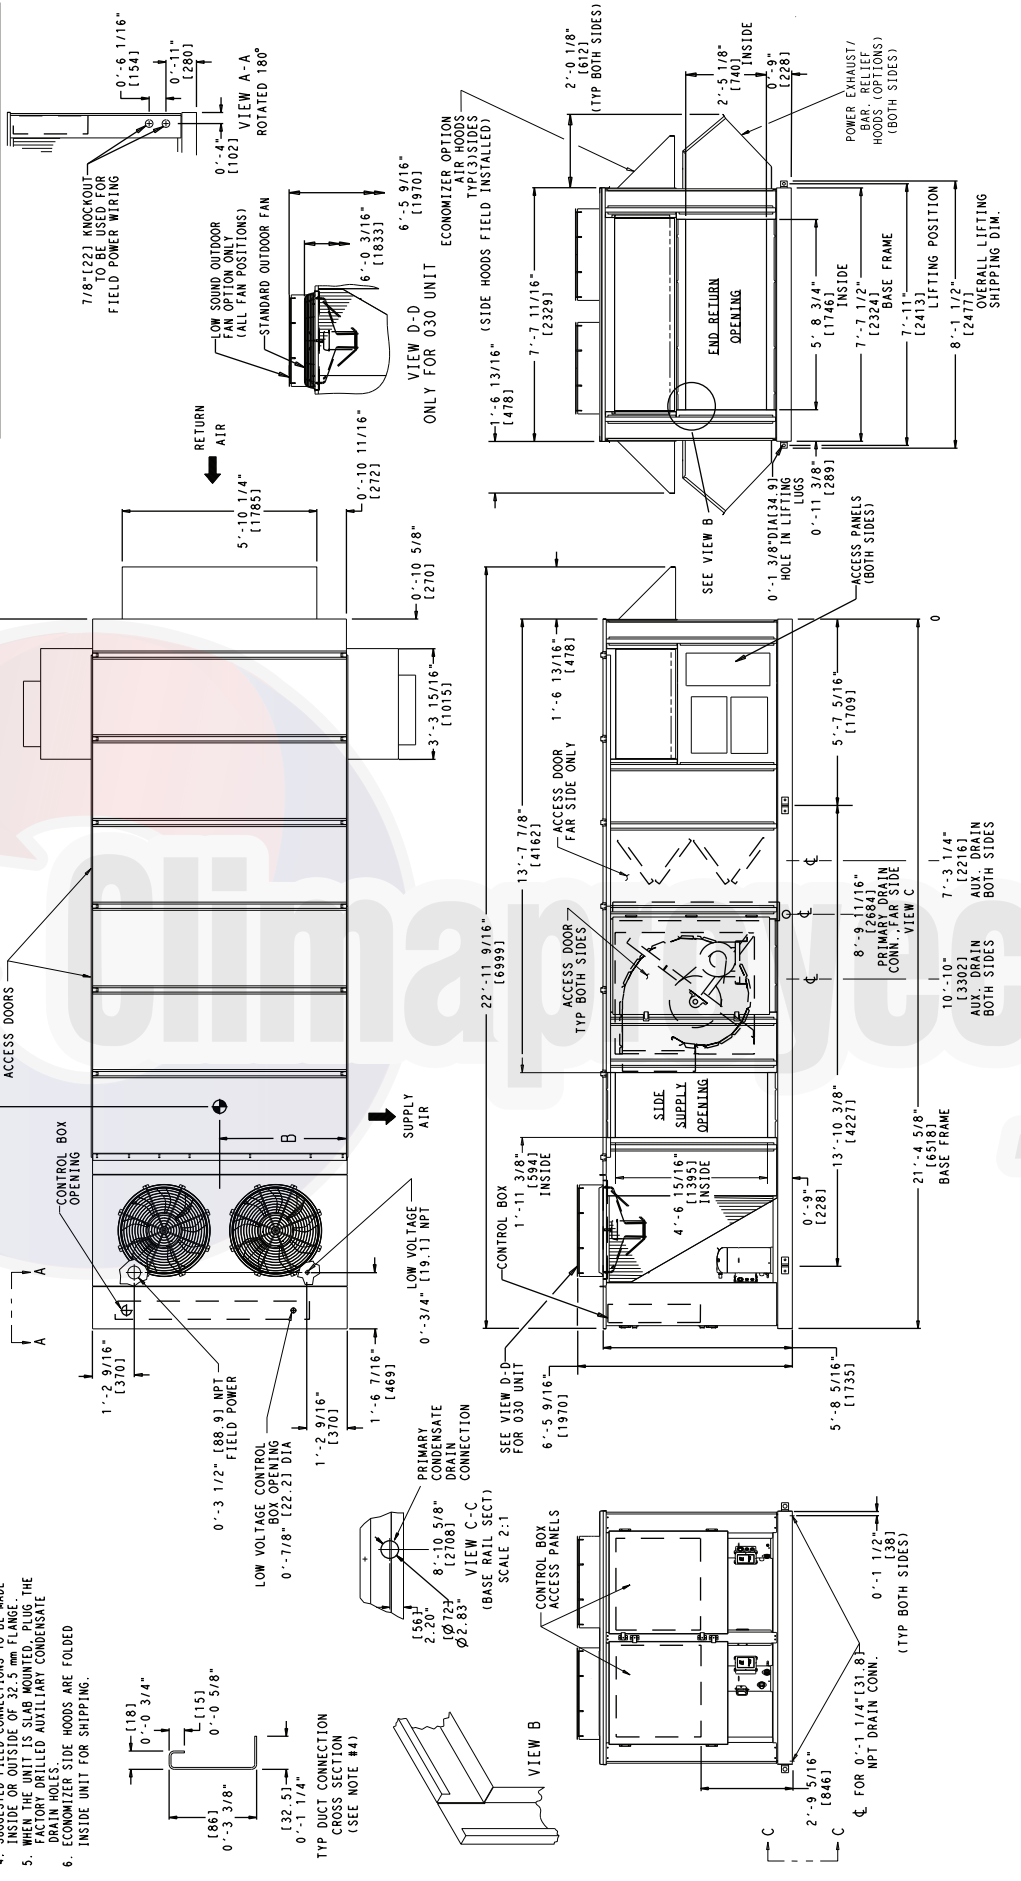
Base Unit Dimensional Drawing — 50P4, P5, P8, P9030, 035 (Standard Chassis Unit Shown)
